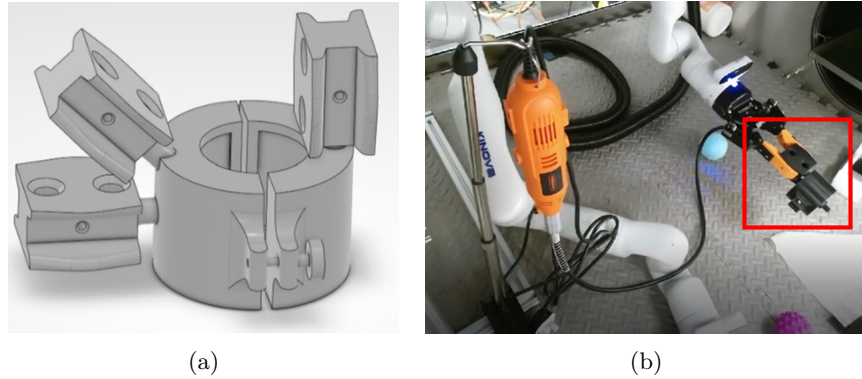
Tool interface design with a clamping feature (a) and a teleoperated manipulator holding a rotary cutting tool with this type of tool interface (b).
